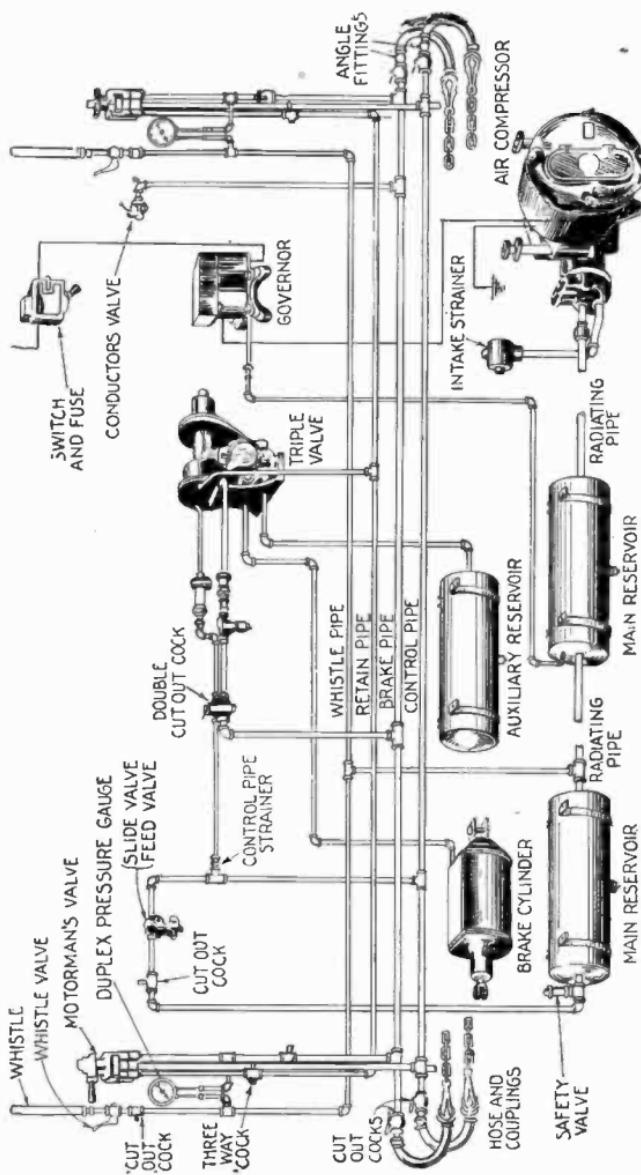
,315.—General Electric automatic variable release air brake equipment for motor car, showing parts and pipe connections.
